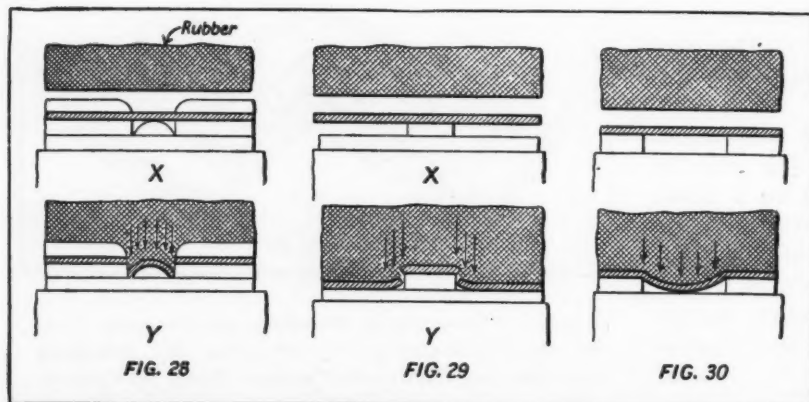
Arrangement for Blanking Clean Holes. Fig. 29. Blanking Arrangement Giving a Larger Effective Pressure Area, but Resulting in Rough Edges. Fig. 30. Setup for Blanking which will Result in Torn Edges
